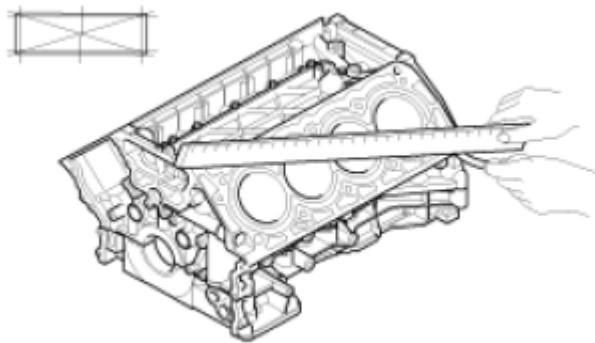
Measuring Surface Contacting Cylinder Head Gasket Using Precision Straight Edge
